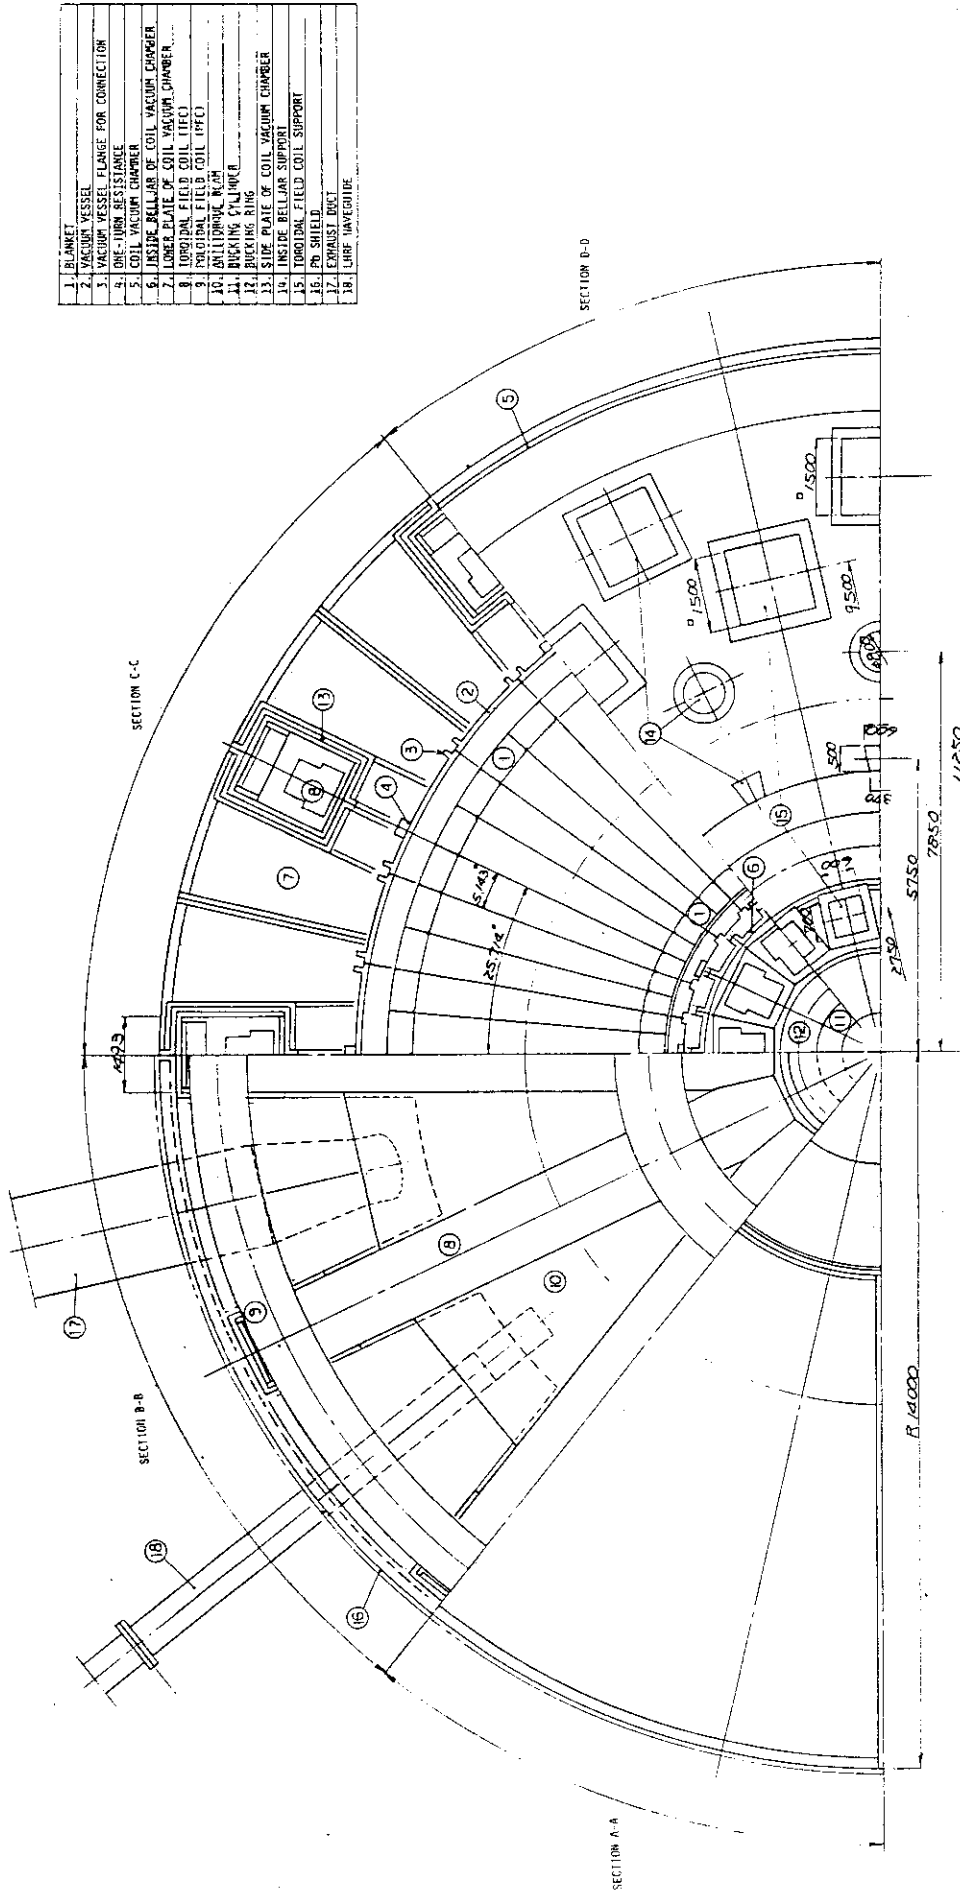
SPTR Power Plant (Elevation View)
